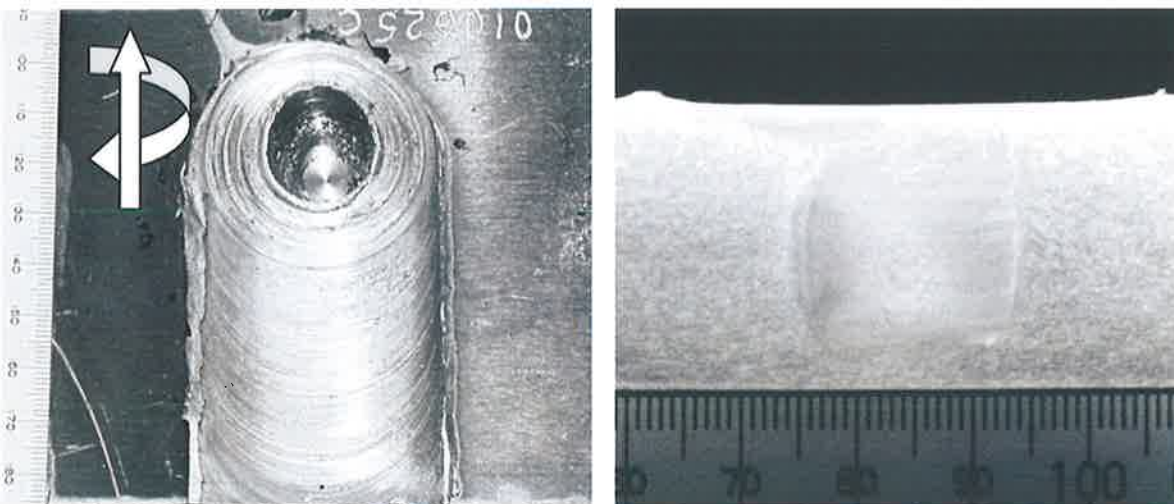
Weld 625C top view left and weld macrograph right demonstrating a sound and defect free weld.
